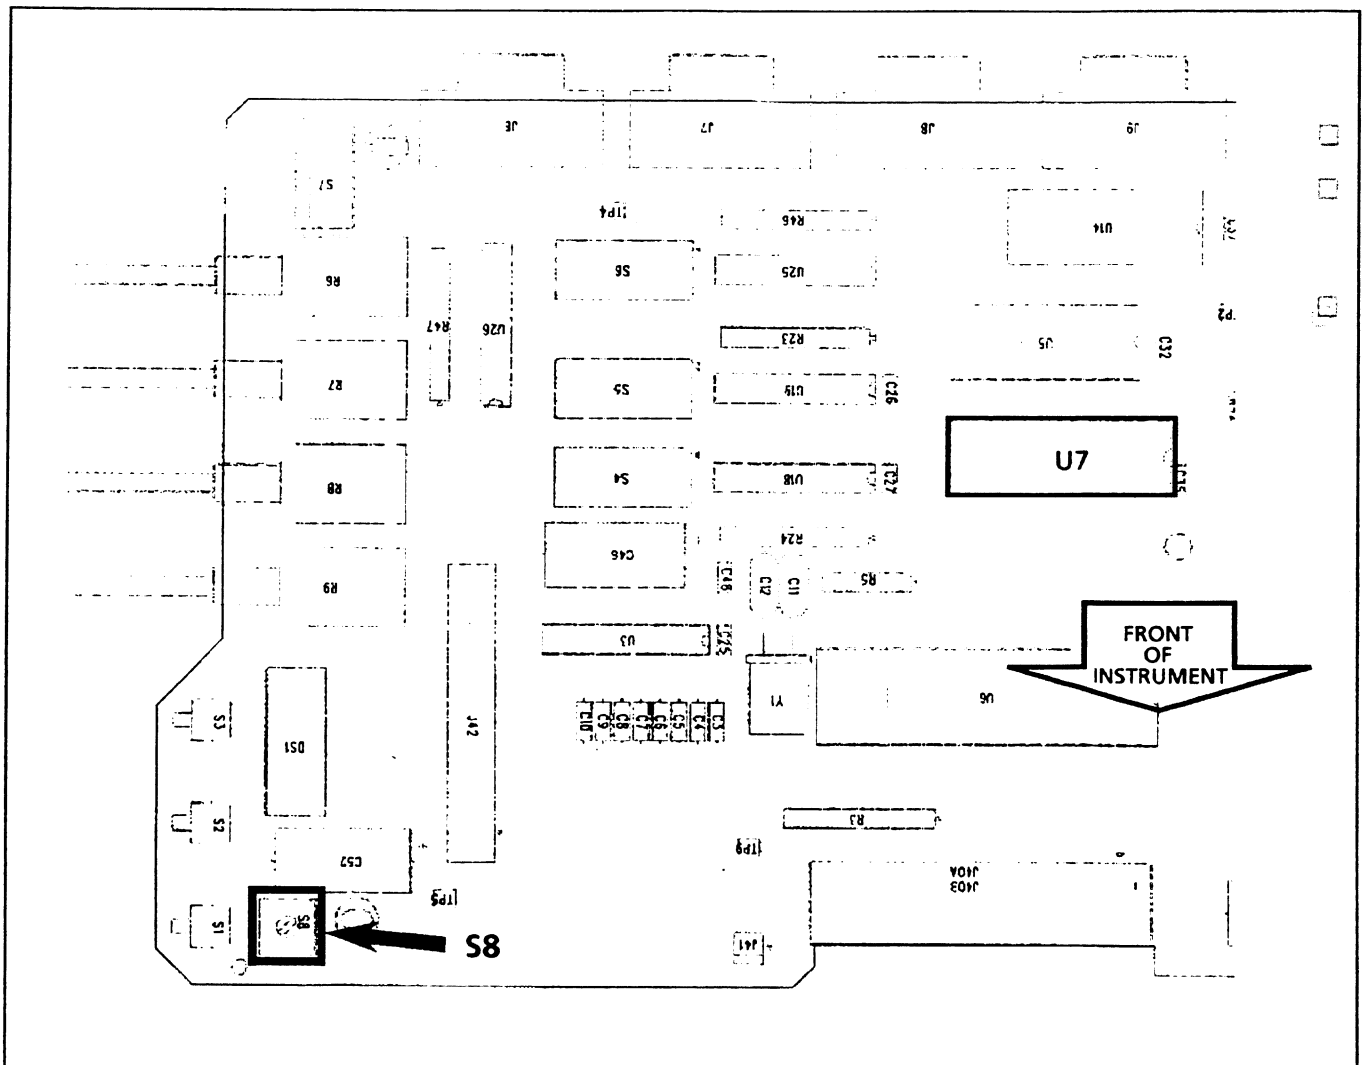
Partial Remote Control (A1) circuit board assembly (RC 211) showing location of U7 and S8.
